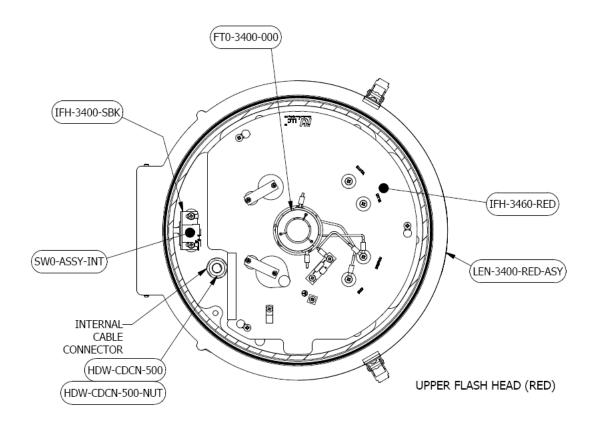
IFH-3400 Dual Flash Head Dimensions and Mounting Detail - 2
